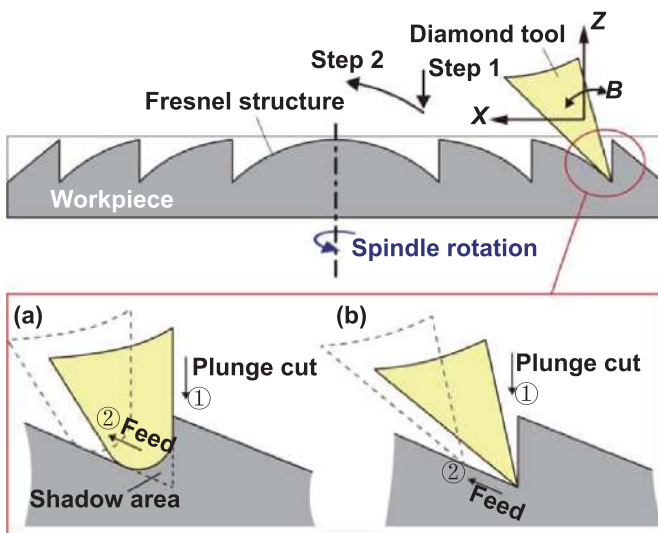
Machining models for the Fresnel structures using (a) a round-nosed tool and (b) a V-shaped tool.
